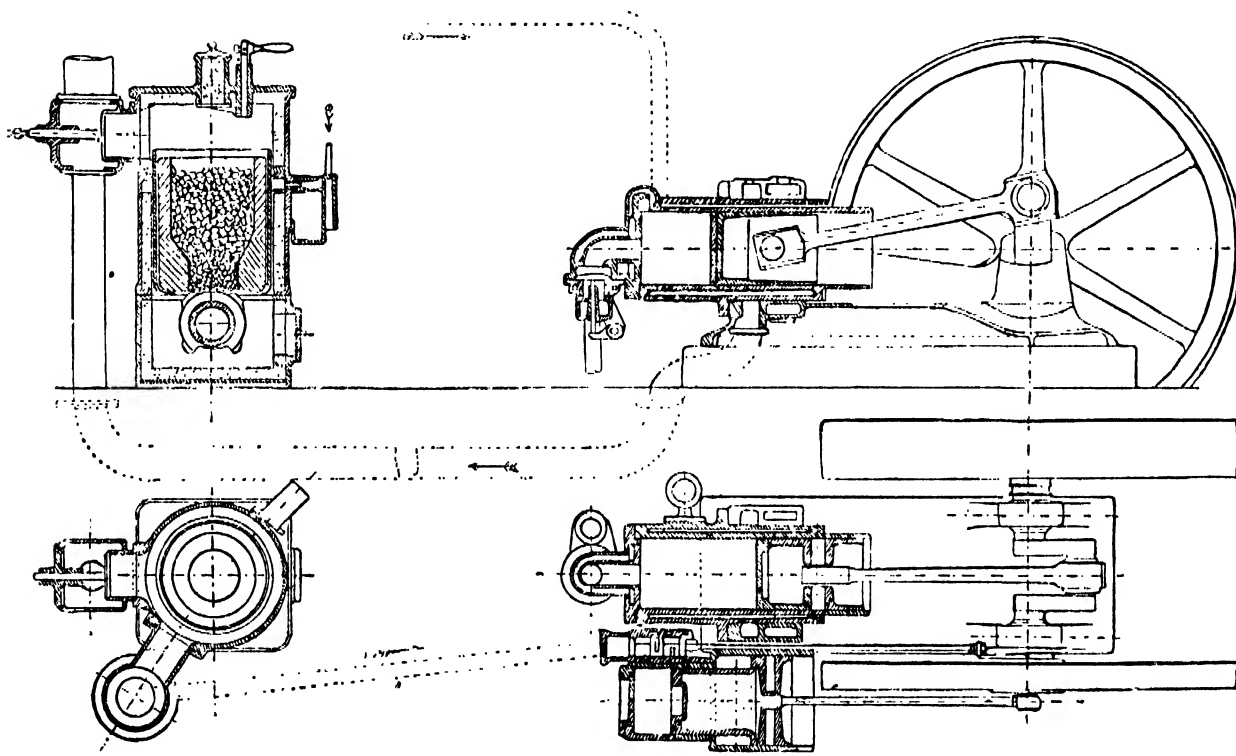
Bemer Suction-Gas Producer and Engine: Sectional Elevation and Plan
